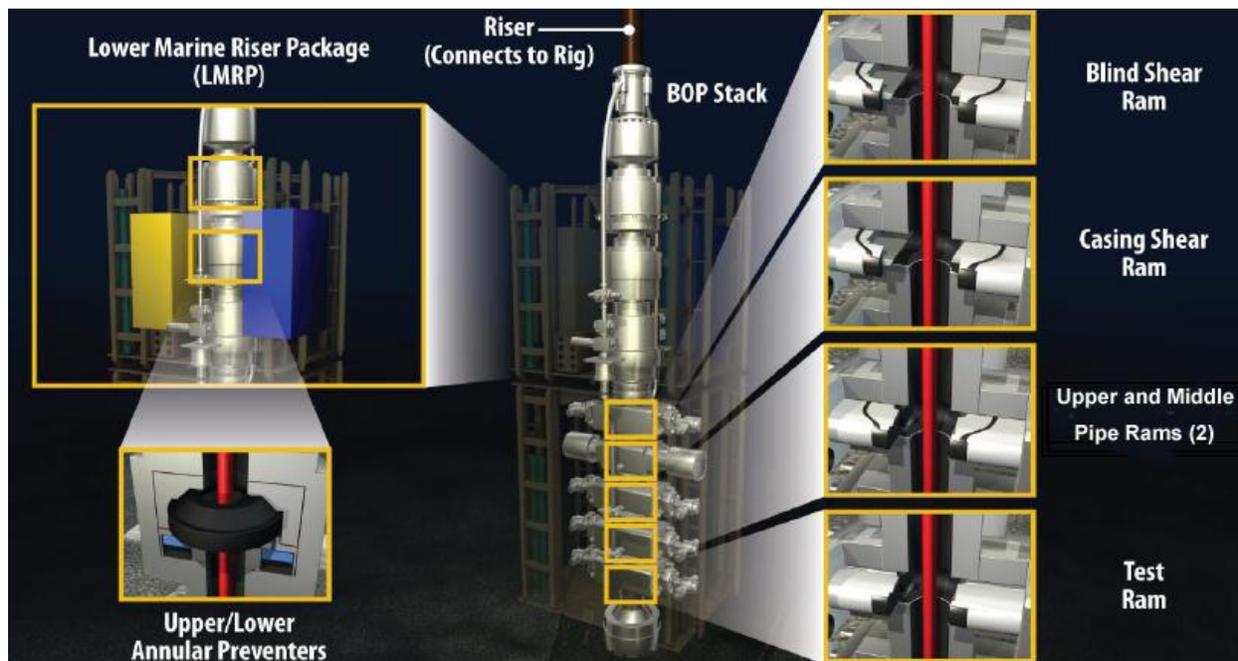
Arrangement of LMRP and BOP stack sections¹⁵⁹ (TrialGraphix)
